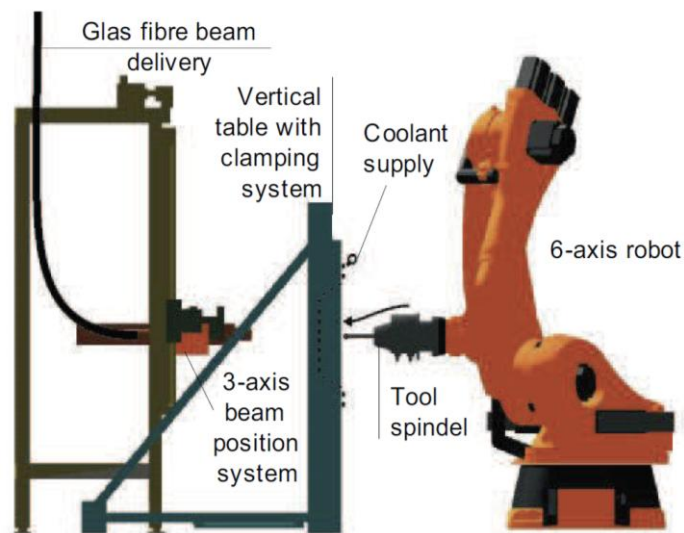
Single point incremental forming with dynamic laser supported heating[52]
